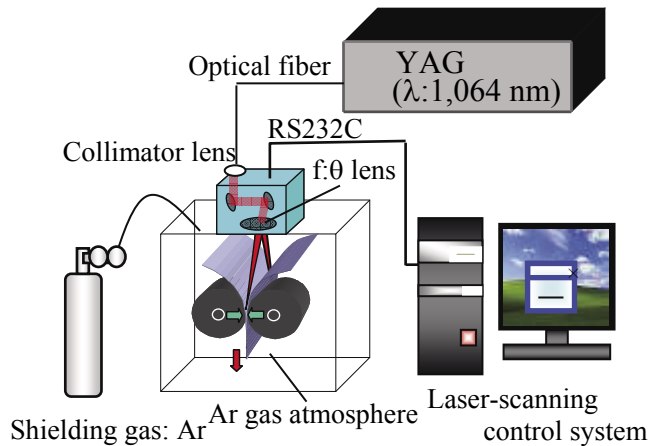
Schematic experimental set-up of laser pressure welding.
